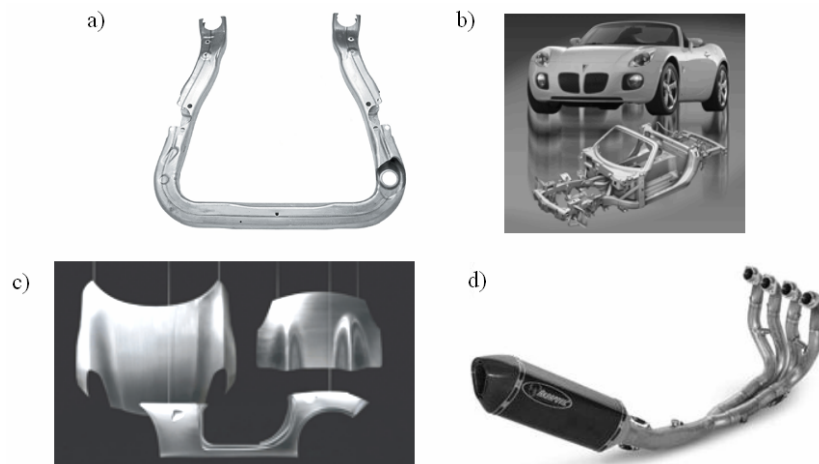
Industrial examples of tube and shell hydroforming: (a) – engine cradle [0], (b), (c) – Pontiac Solstice and parts made by hydroforming [12], (d) – exhaust system of Kawasaki [14]
